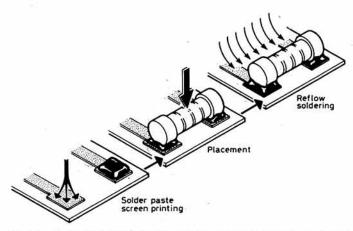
A standard procedure for fixing surface-mounted components on the upper side of printed circuit boards, using solder paste screen printing
